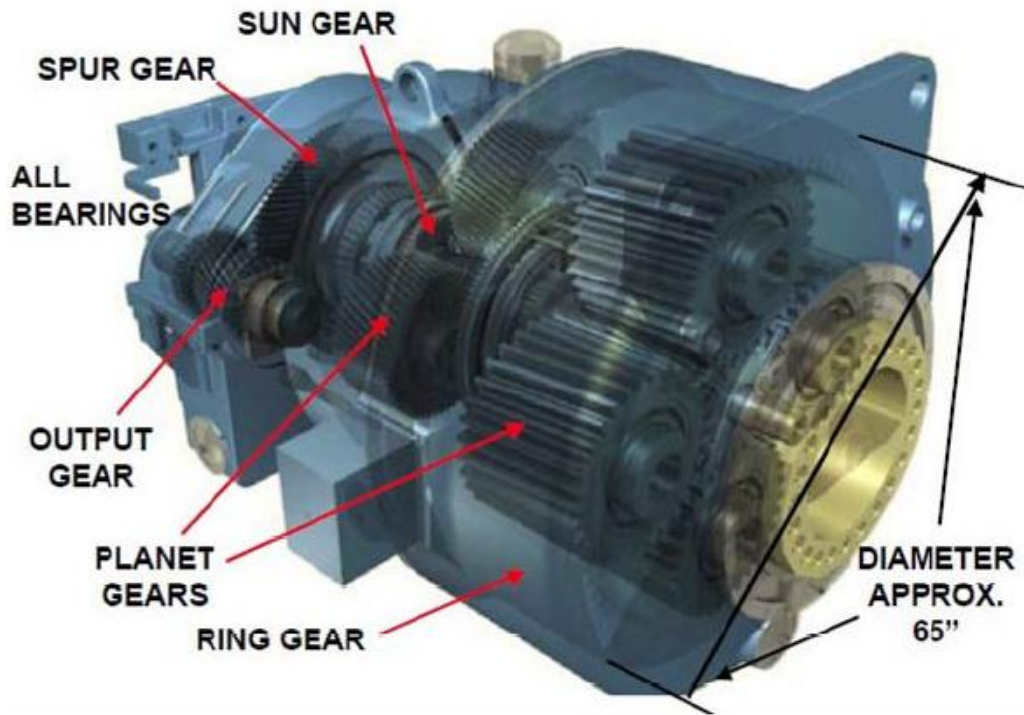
Heat treated parts of a typical wind turbine gearbox. AGMA Technical Paper, 2010
